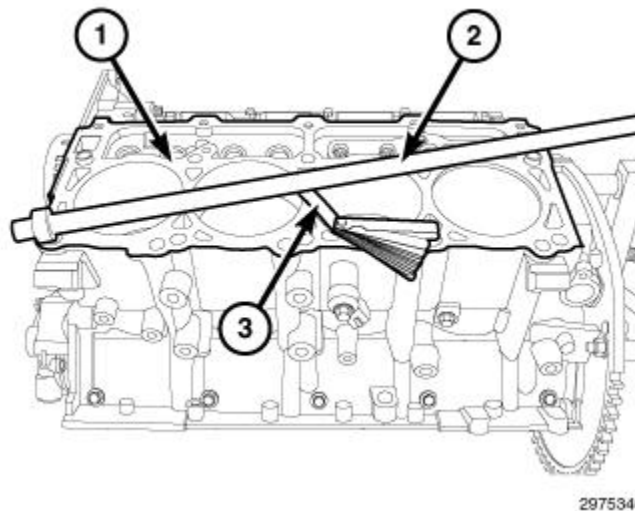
Checking Engine Block Deck Surface With Precision Straightedge & Feeler Gauge
